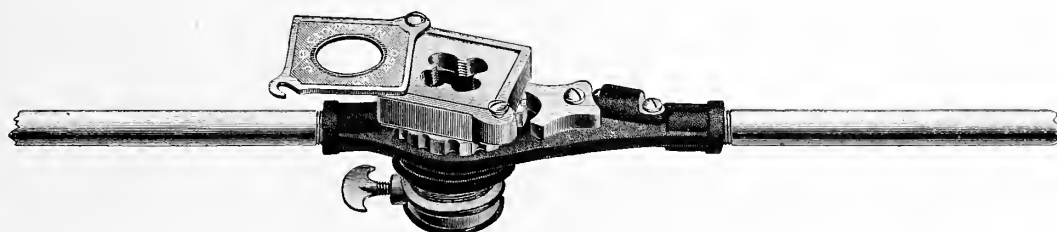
MILLER'S REVERSIBLE RATCHET DIE PLATE.
